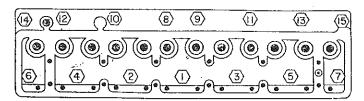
A Final tightening sequence on 228, 236, 248, 256, 270, 302 engines
